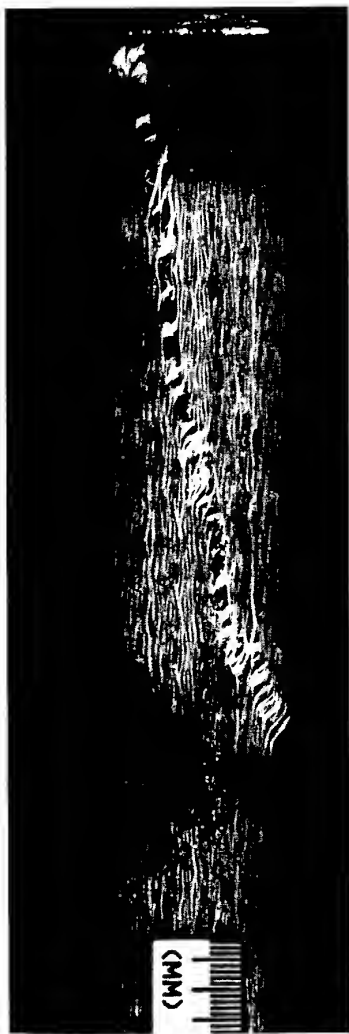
Compression failure of 25 mm thick E-glass/polyester intact panel with kink shear band.
